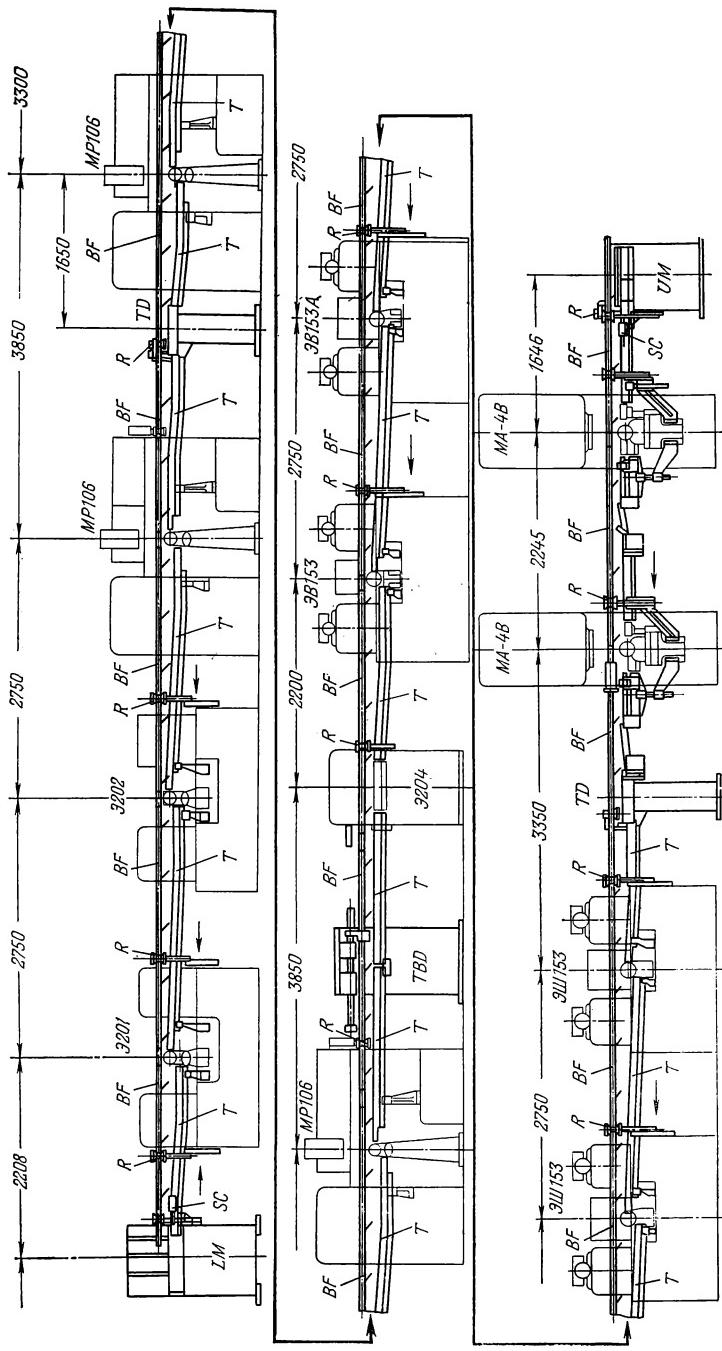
General view of the handling system of the model ϑ -200 transfer machine:
